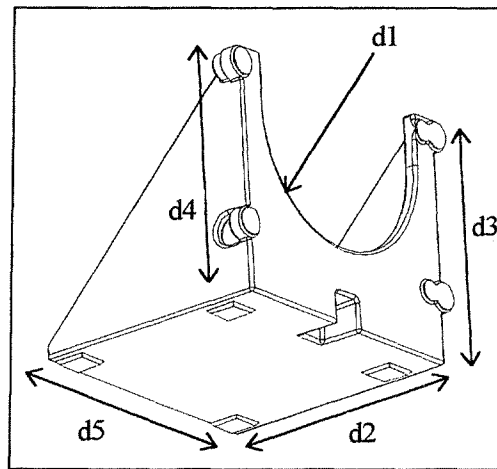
3D CAD model of part used in this investigation, showing dimensions used over.
